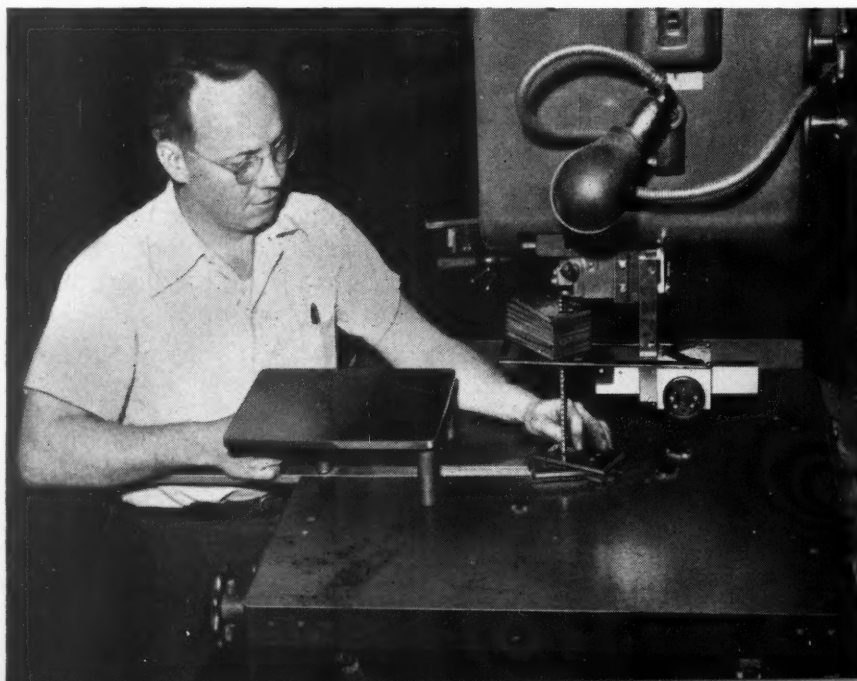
Increased production and longer blade life are obtained with this set-up for making multiple internal cut-outs with only one weld of the blade
